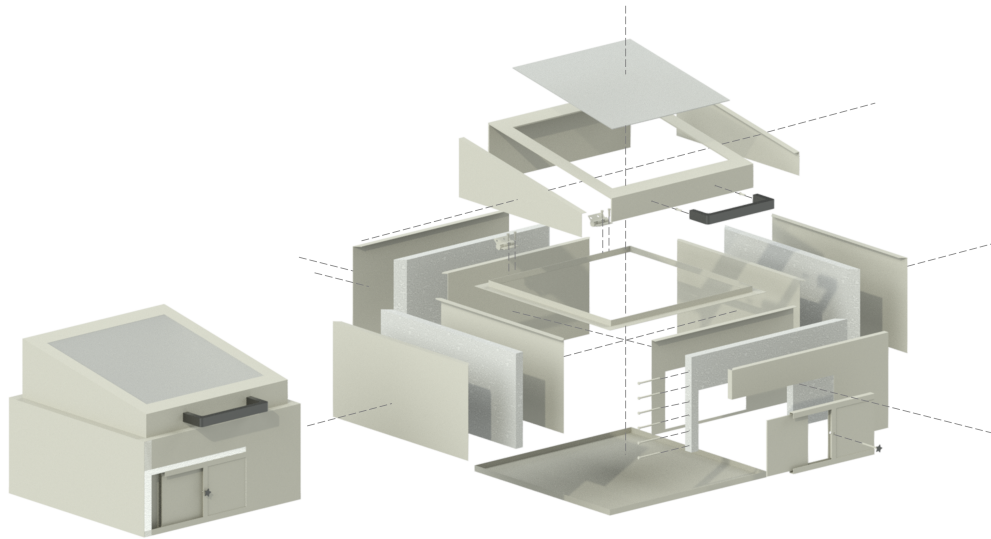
3D view and exploded-view drawing of the solar still prototype.
